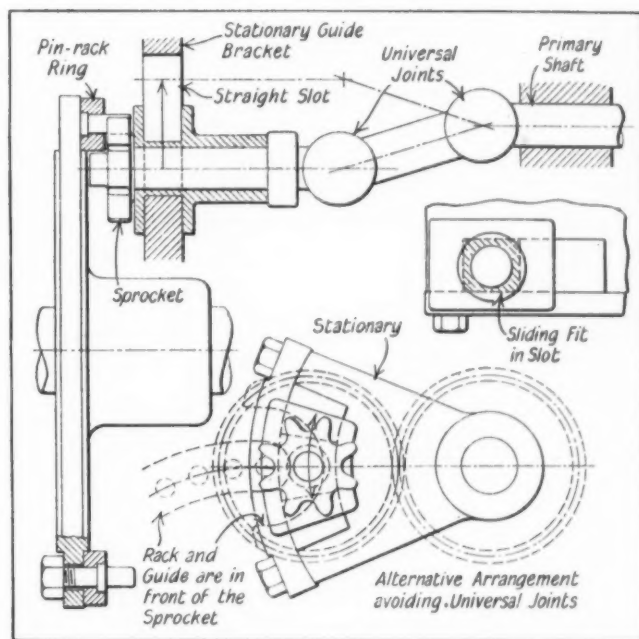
Types of Drives Arranged to Permit Oscillation of Driving Shafts such as the One Shown at b, Fig. 1
